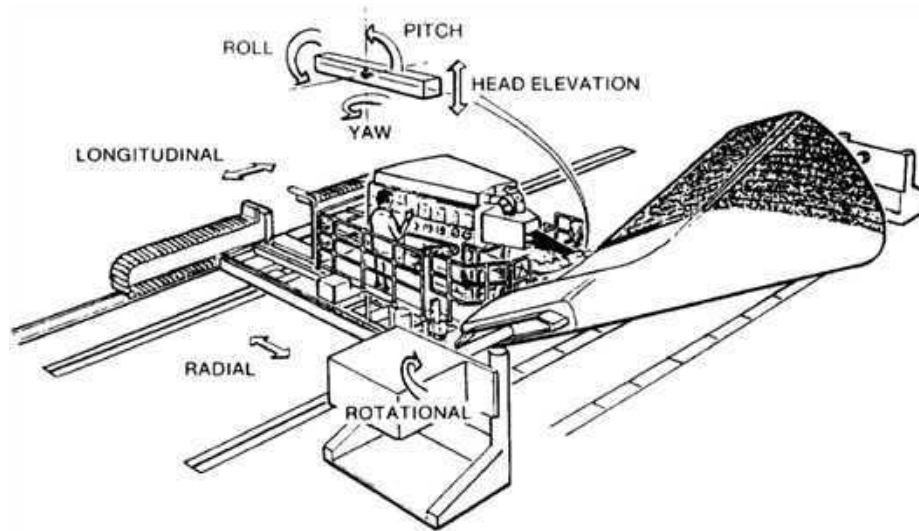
Drawing of early AFP machine created by Hercules [18].
